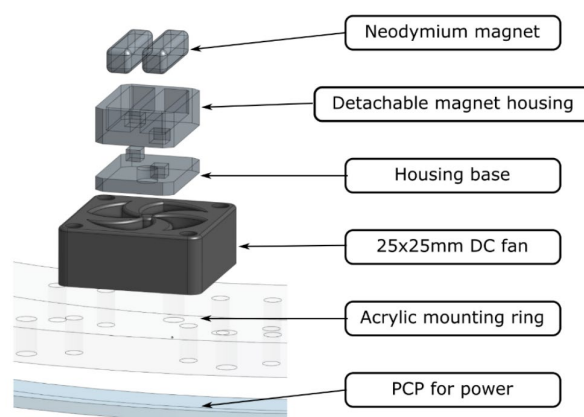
Exploded view of fan stirrer assembly. Reproduced from Salley et al.⁷
